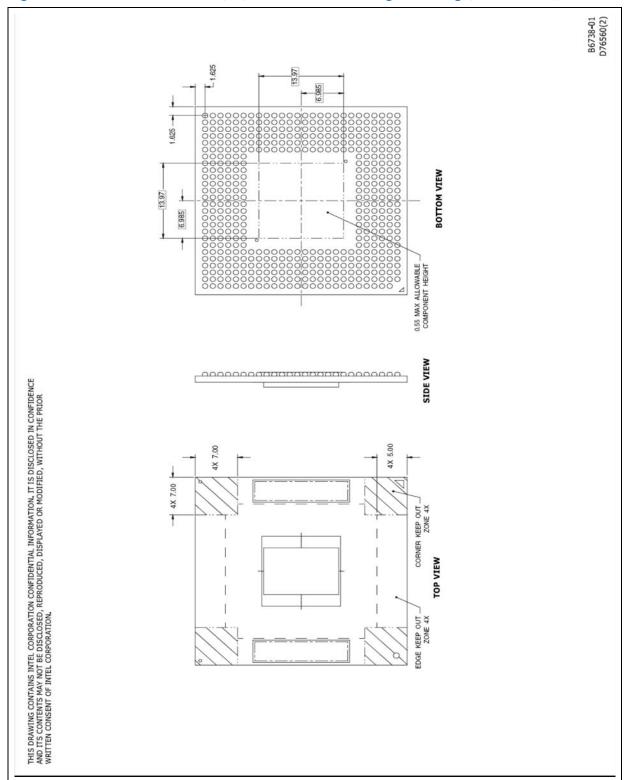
1-MB on 6-MB Die (SV) Micro-FCBGA Package Drawing (Sheet 2 of 2)
